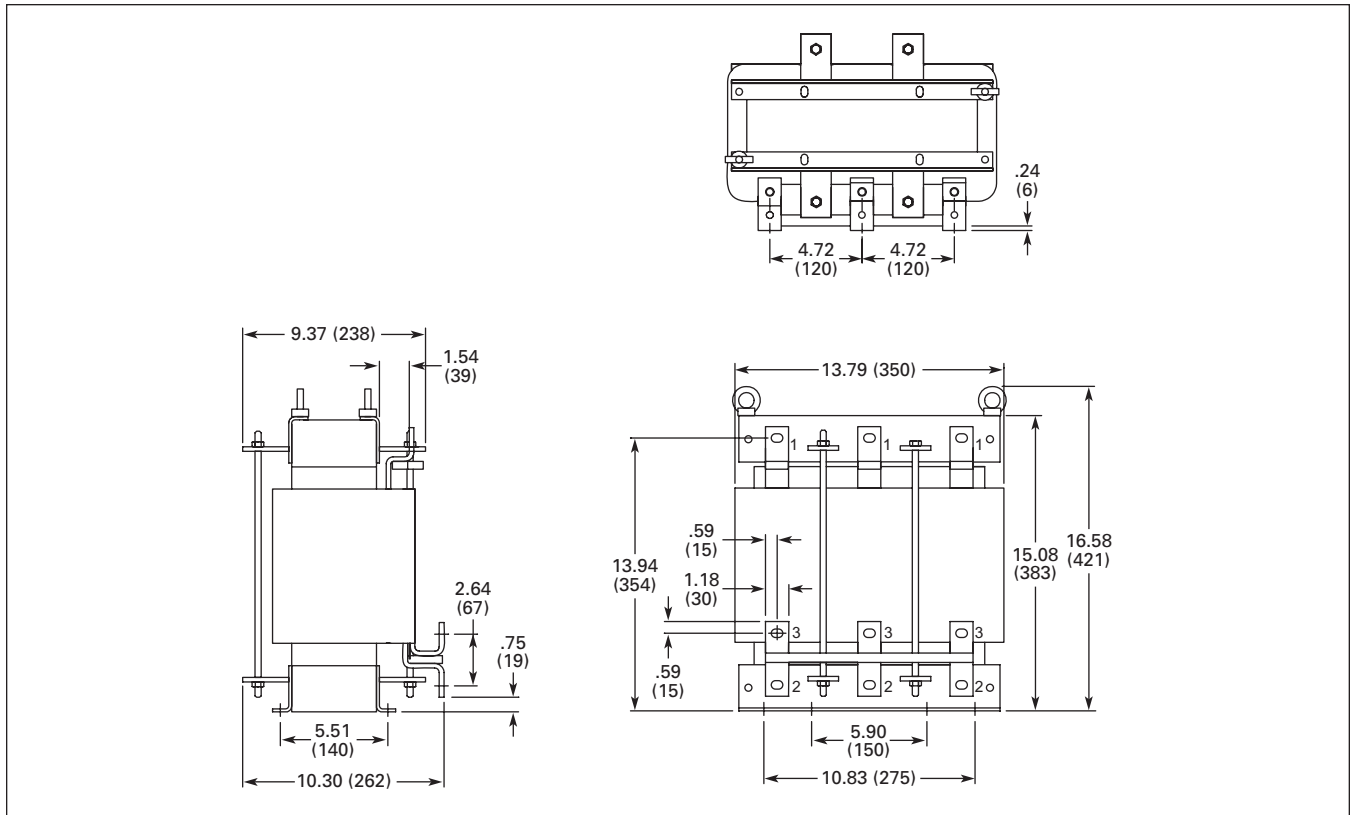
Dimensions of AC Choke CHK0400 in Inches (mm)
